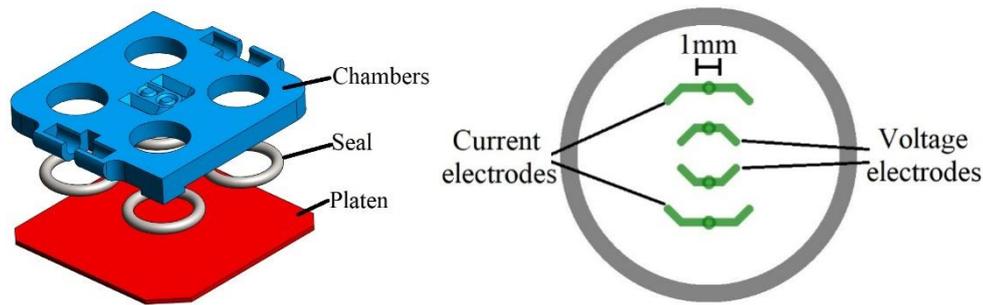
Reusable 3D-Printed wells. (a) Exploded view of the device with four wells for IS measurements of aqueous solutions and (b) top view of the electrode array of one well.
